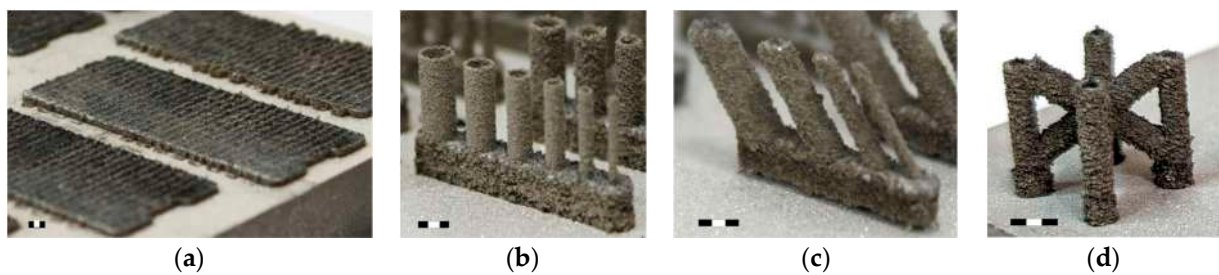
(a) Single-weld samples produced on the top of 1 mm thick WE43 material; (b) hollow struts; (c) inclined struts; (d) BCCZ cell (scale 3 mm).
